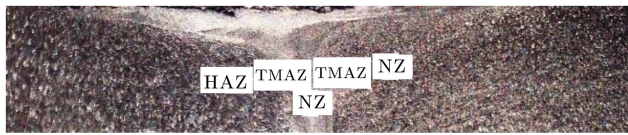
Macrostructure of the welded joints of UFSW 500 rpm 80 mm/min.
